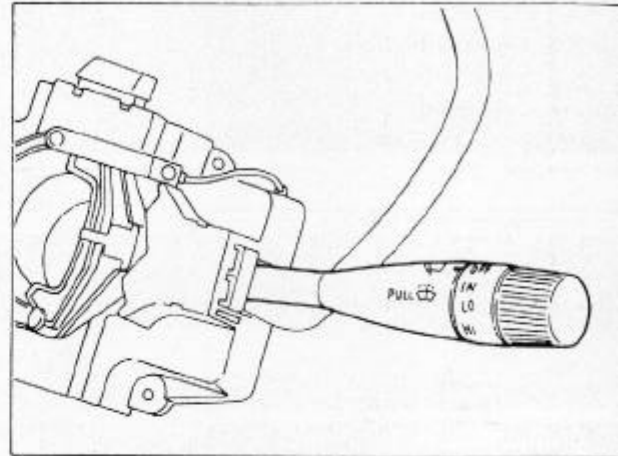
13 WIPER SWITCH CONFIGURATION
